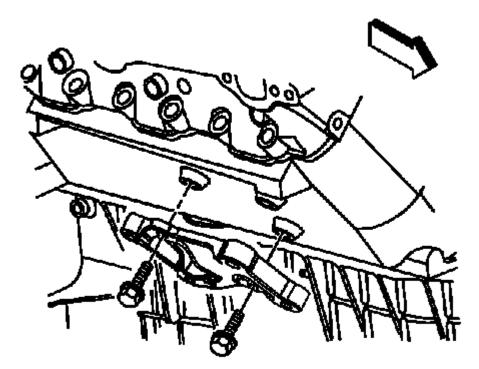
View Of Right Side (Left Side Similar) Engine Mount Side Bracket & Bolts Courtesy of GENERAL MOTORS CORP.
